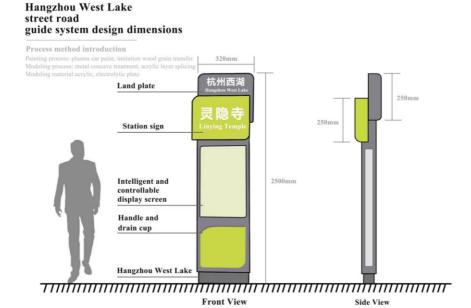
Hangzhou West Lake street road guide system design dimensions.
